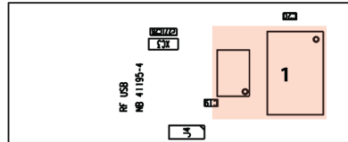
RavenUSB Back Assembly - Showing the primary components:
